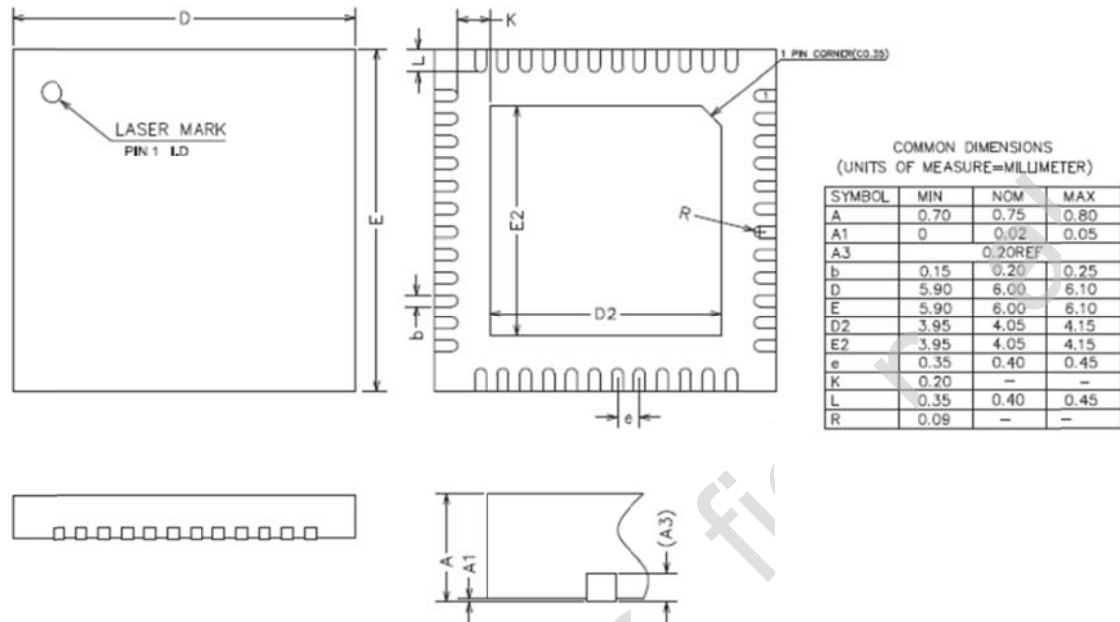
MXD2660B QFN48 Package Outline Drawing
